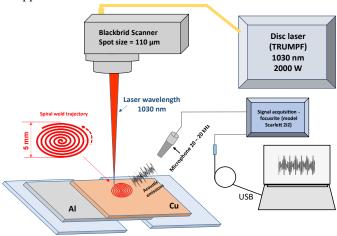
Schematic of the laser welding and acoustic signal acquisition for Cu-Al welding
